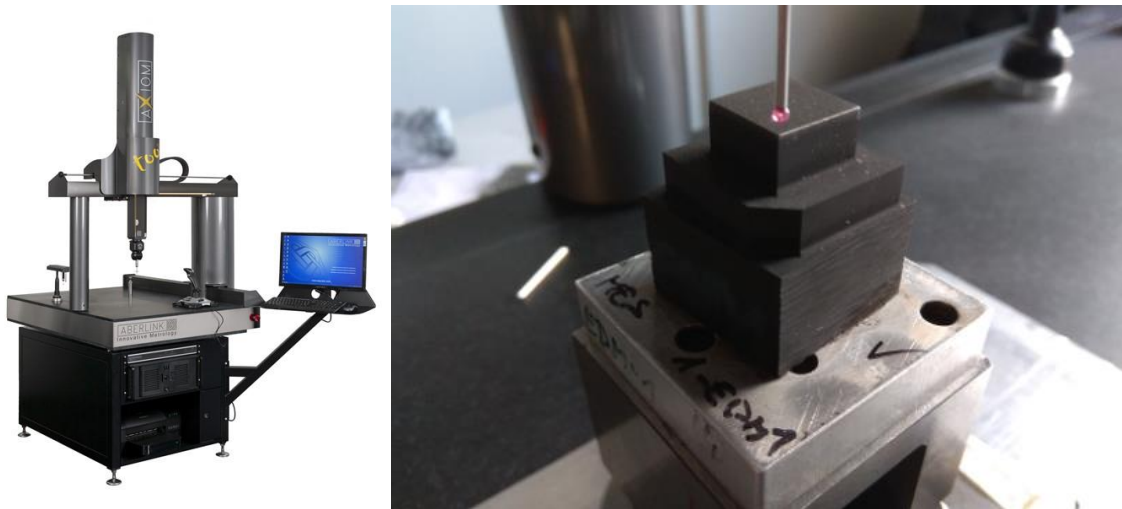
Aberlink – Axiom too CNC CMM used for measuring (left), measurement of a tool electrode (right).
